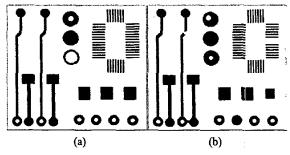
A 400 x 400 sample PCB image (a) Good quality PCB image (b) Defective PCB image
